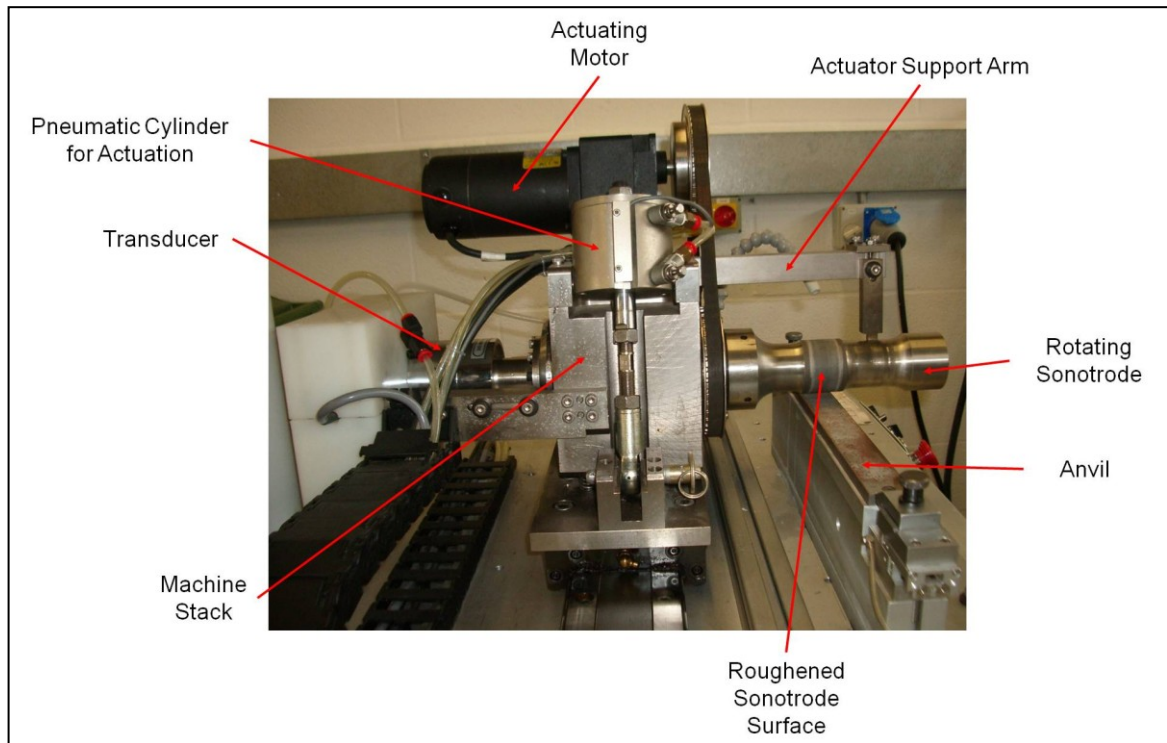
The Alpha ultrasonic consolidation machine (rear)
